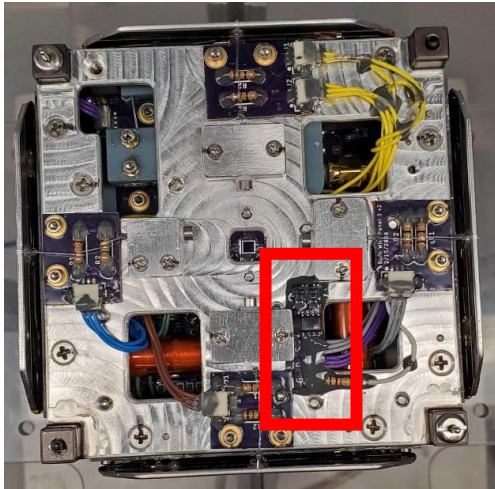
Inhibit Circuit Modification PCB (outlined in red) mounted on spacecraft -Z plate
